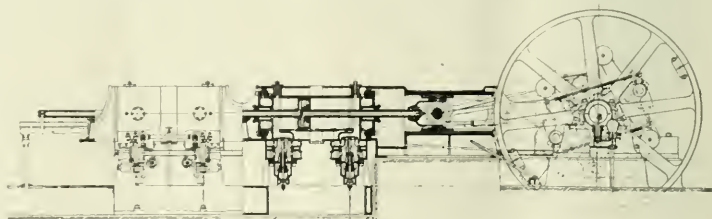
COMPLETE EXPANSION TANDEM GAS ENGINE.
